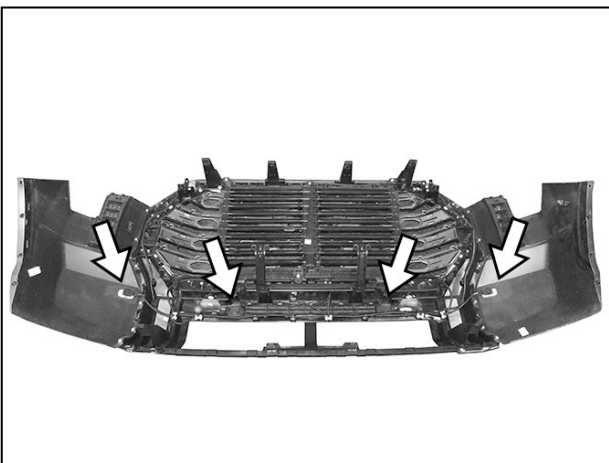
Temporarily install Bumper (see Figure 53). Check fit between Bumper and trim plastic as necessary. Clean up cut sections and push Edge Trim onto cut bumper covers and fill panels (arrows)
